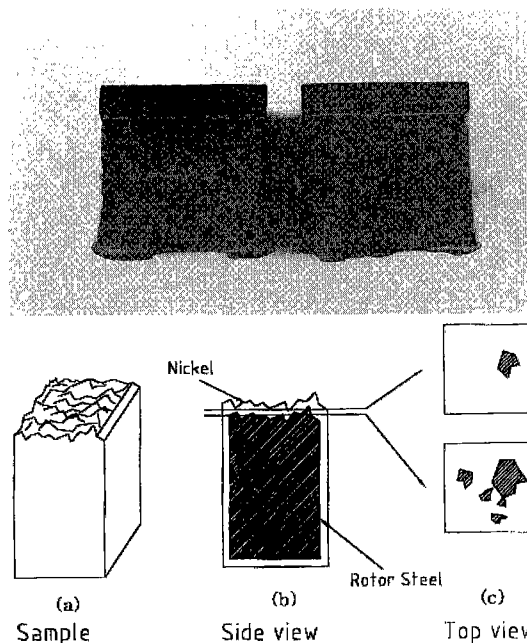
Fractured specimen is encapsulated in epoxy and polished parallel to the fracture plane. Islands emerge in the polished plane
